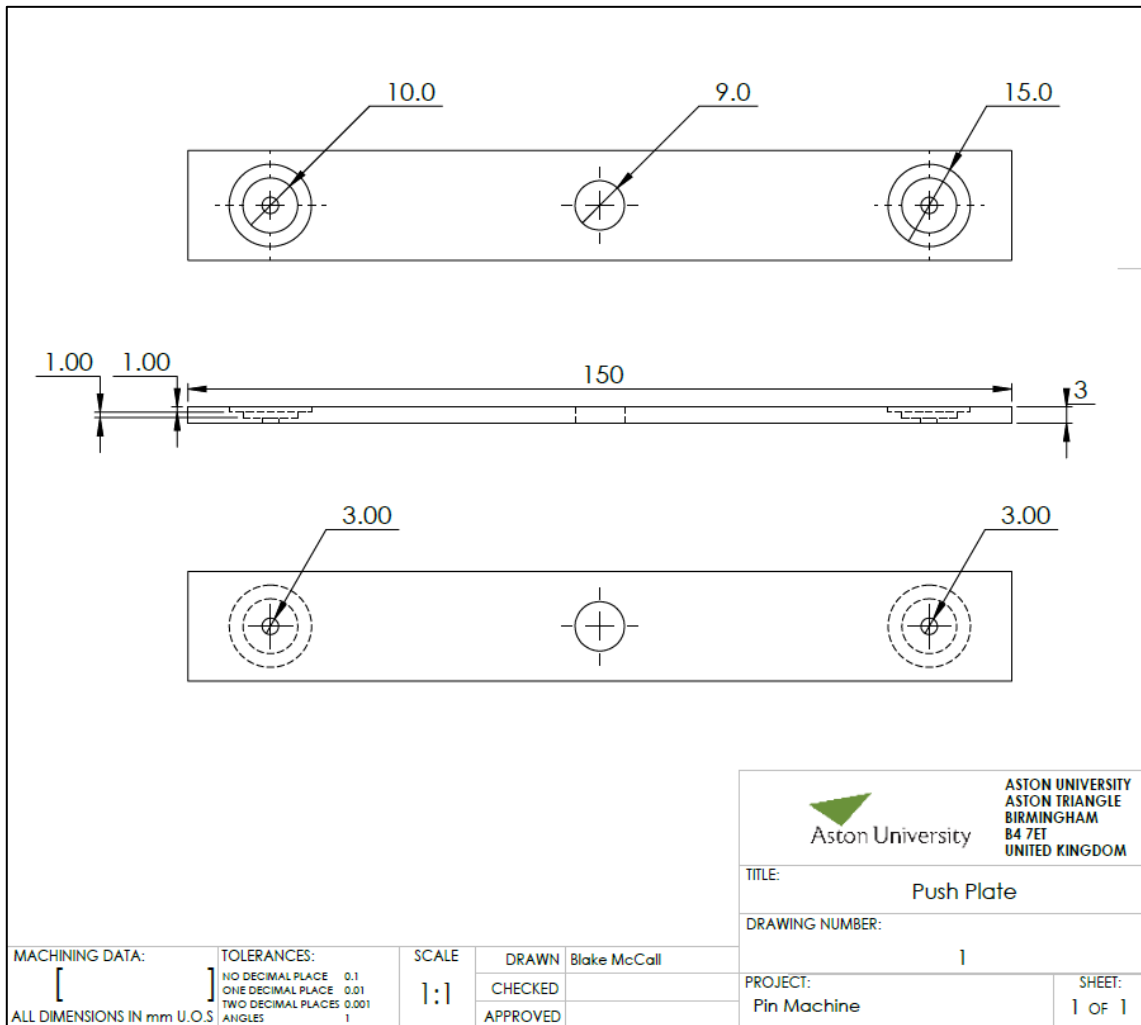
Working drawings of the Push Plate Component of the Pin Machine
